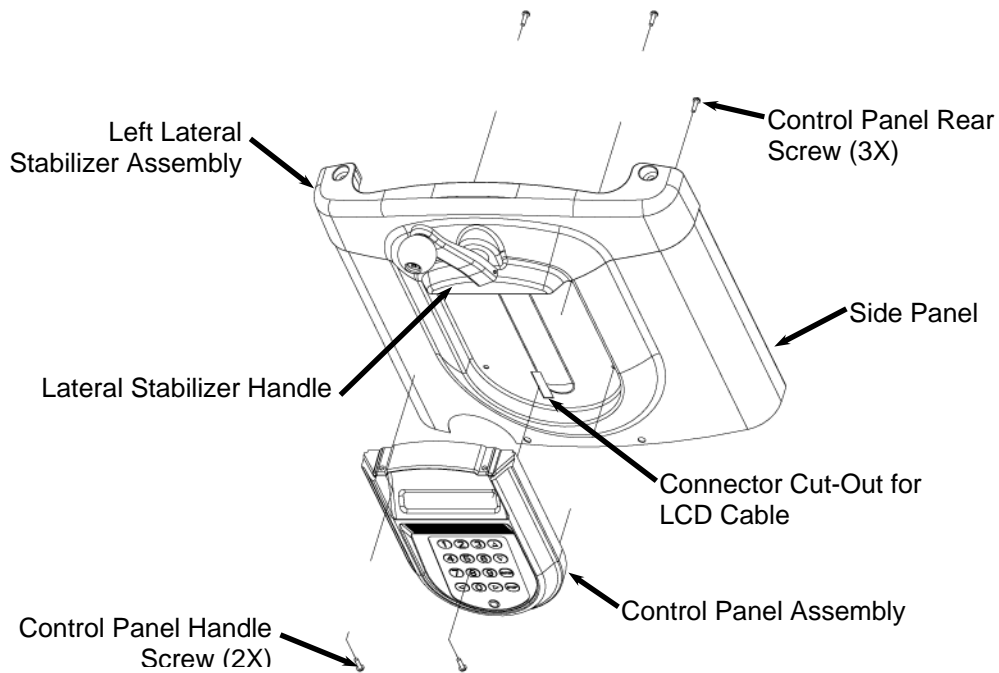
REMOVING THE CONTROL PANEL ASSEMBLY
